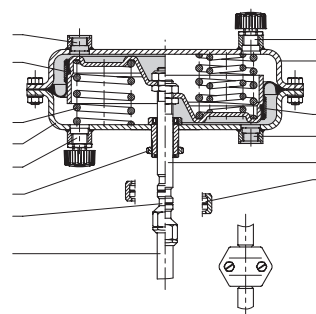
· Sectional drawing of Type 3271 Pneumatic Actuator (right diaphragm half with additional springs)
